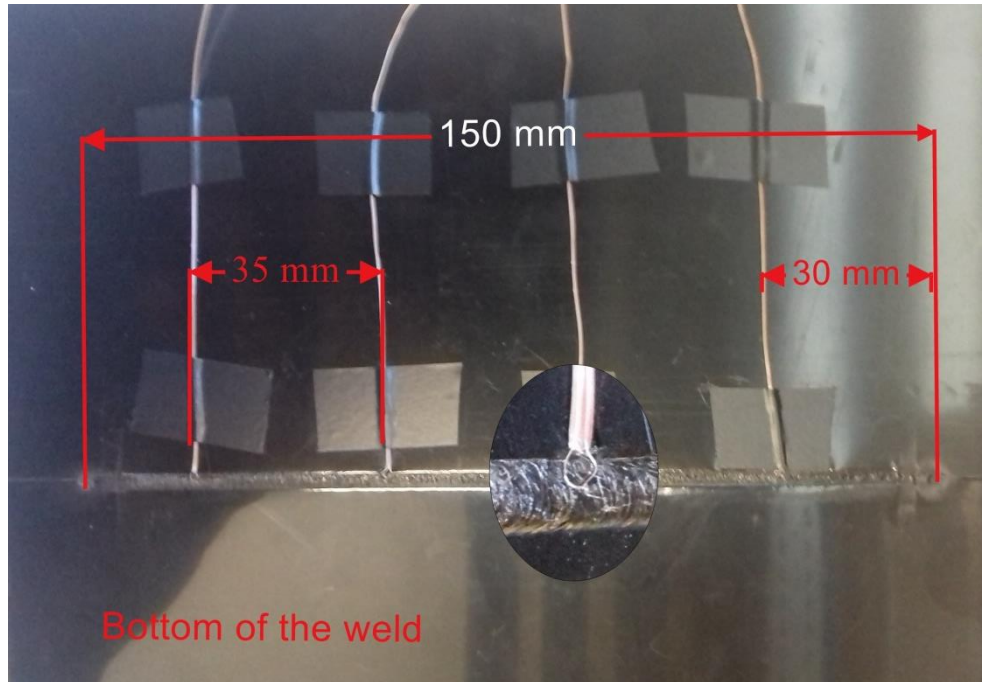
Thermocouples position underneath the weld bead.
